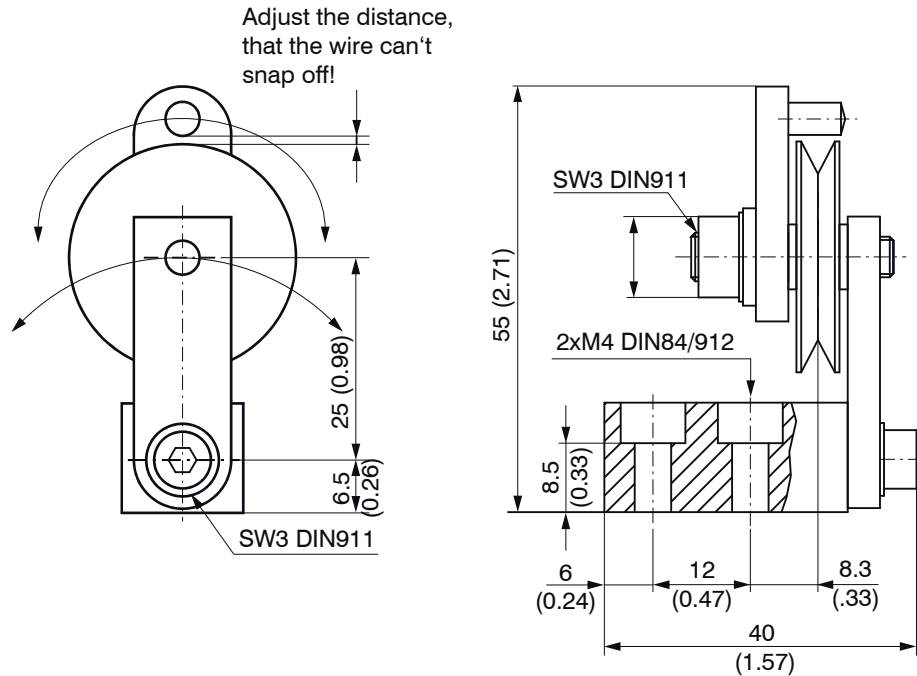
Guide pulley TR1-WDS with mounting socket, dimensions in mm (inches), not to scale
